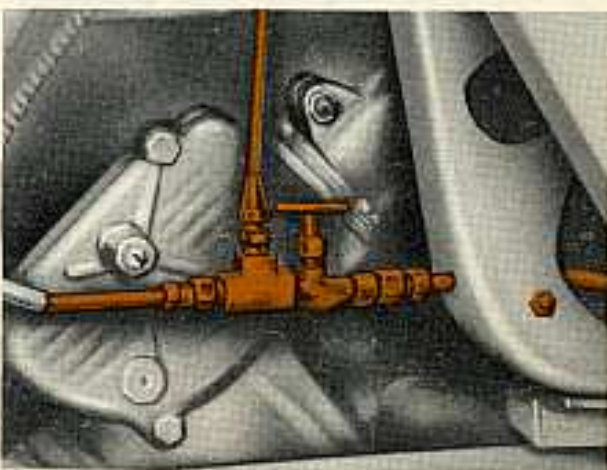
After you've drilled a hole in the bracket and run the line thru, clip the line on the other side using the same bolt hole.
